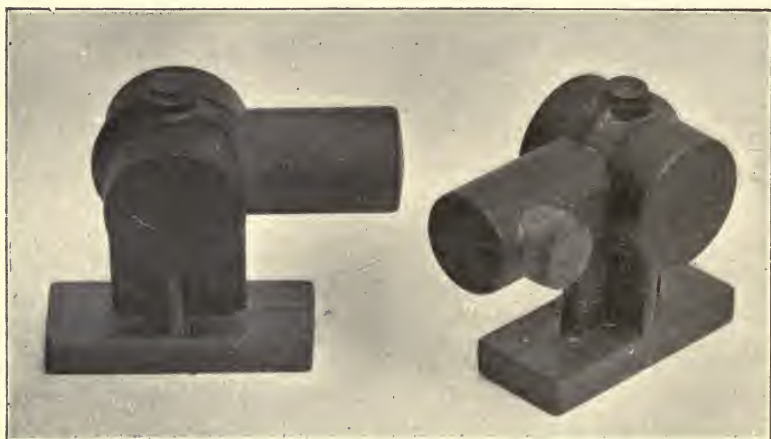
PATTERNS FOR MAIN BEARINGS.
